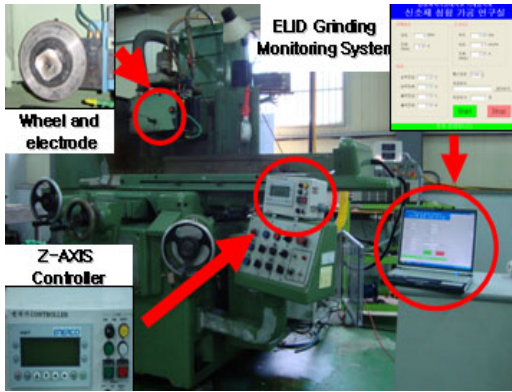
Experimental setup for ELID grinding system using reciprocal surface grinding machine
